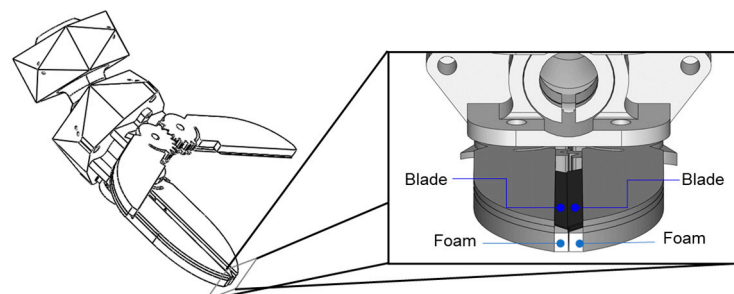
Clamp cutting part with two blades and gripping part with two foam pads.
